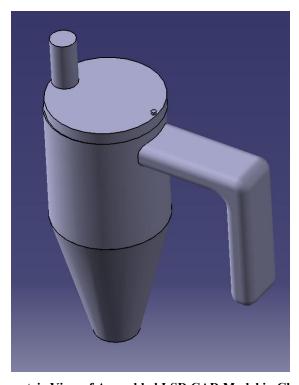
Isometric View of Assembled LSD CAD Model in Closed Position
